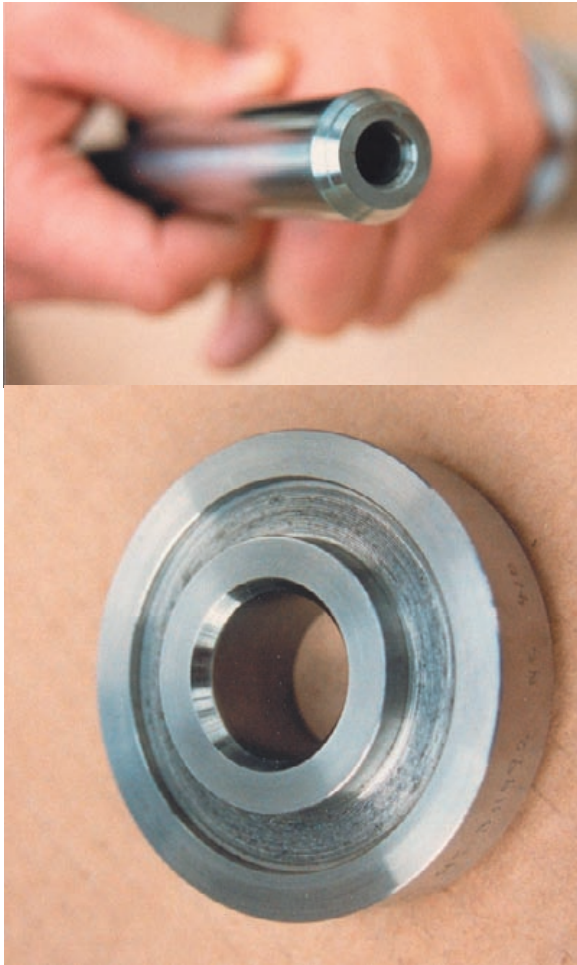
Post Test Spindle and Seat Ring showing no cavitation damage
